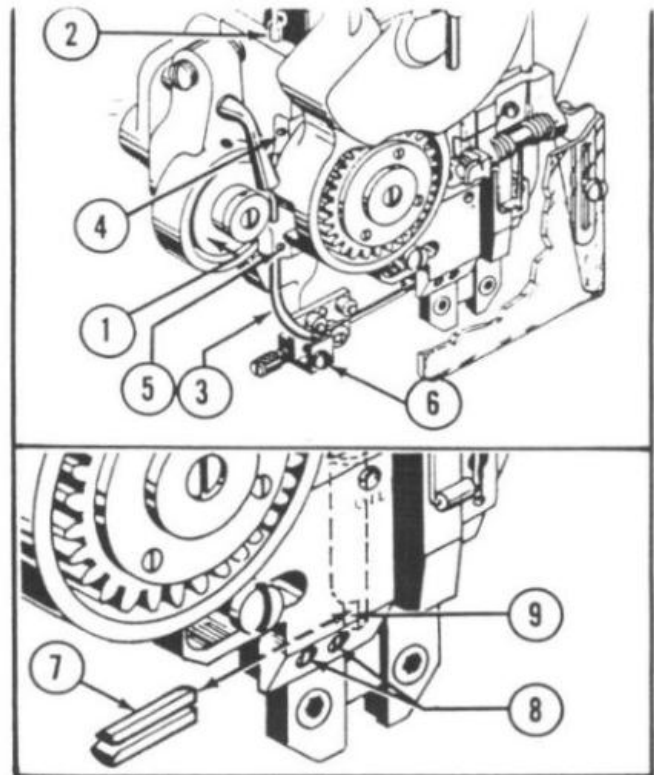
Inspecting Wire Feed Gears, Tubes, and Stationary Cutter
